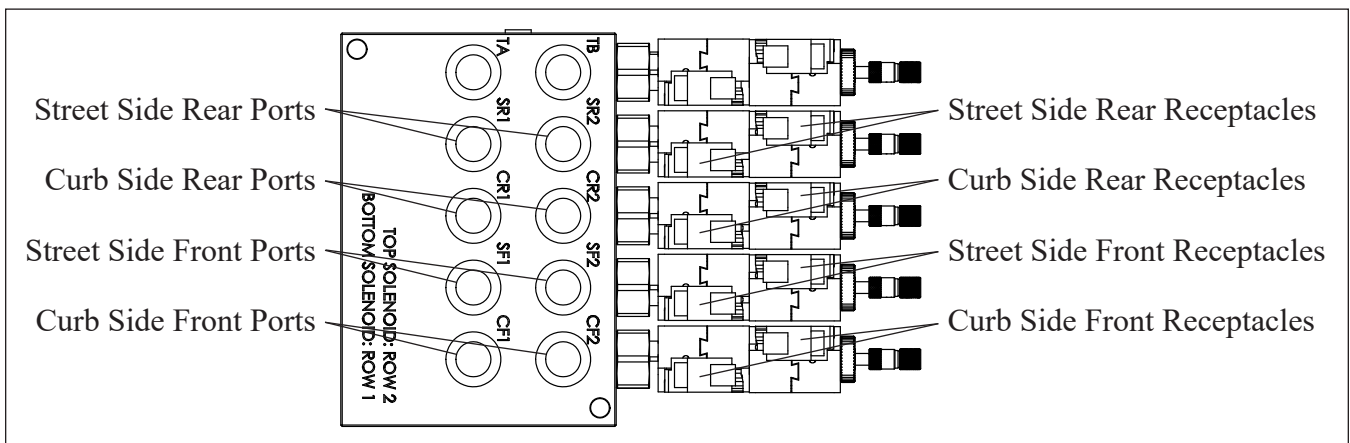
Outrigger/Tool Valve Ports and Solenoid Receptacles
